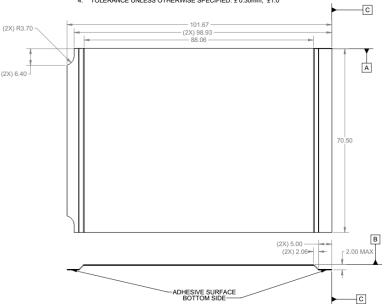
Small Card Bottom Side Insulator (Top and Side View)
